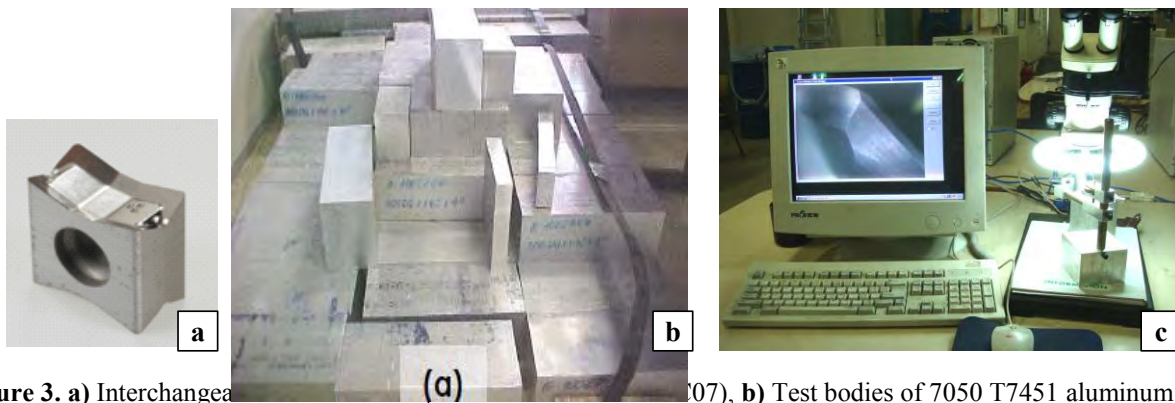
a) Interchangeable tool holder (07), b) Test bodies of 7050 T7451 aluminum alloy and c) Optical stereoscope Wild M3C.
